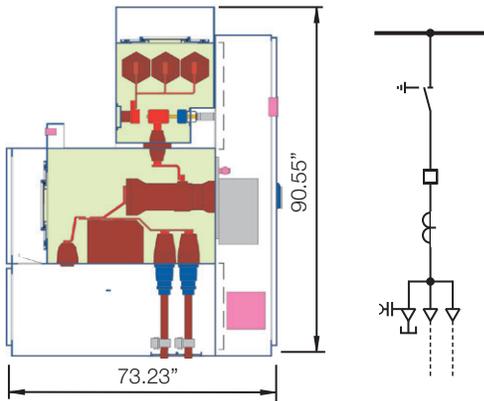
Feeder panel 2000 A with current and voltage transformer and three cables per phase
